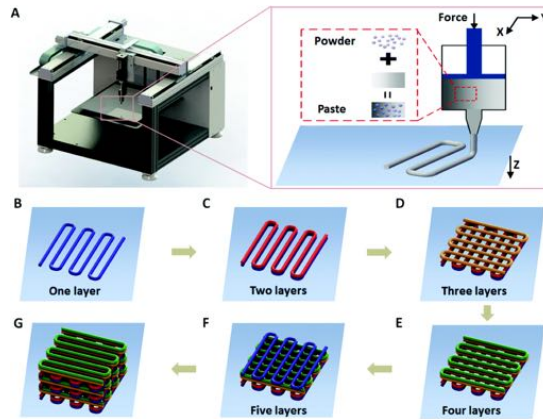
Schematic diagram of a scaffold prepared using the layer-by-layer 3D robocasting technique. (a) The 3D robocasting machine. Inside is drawing of the extrusion equipment (b-g)
